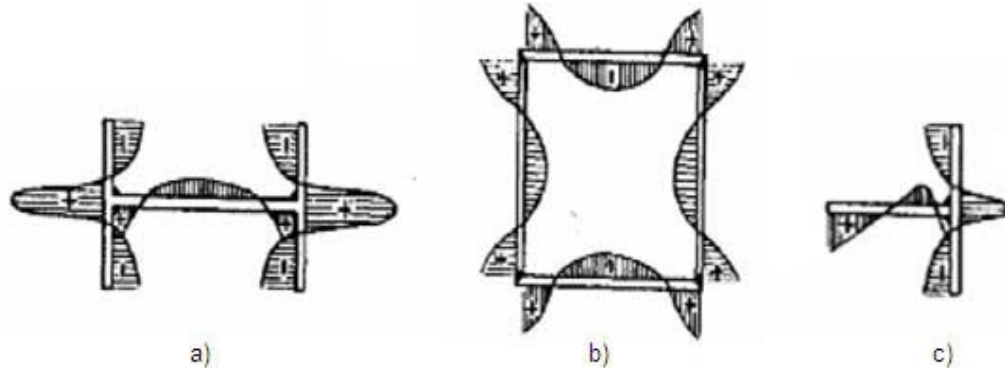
Residual stress distributions on a) H-shaped weld, b) box shaped weld, c) T-shaped welds [17].
